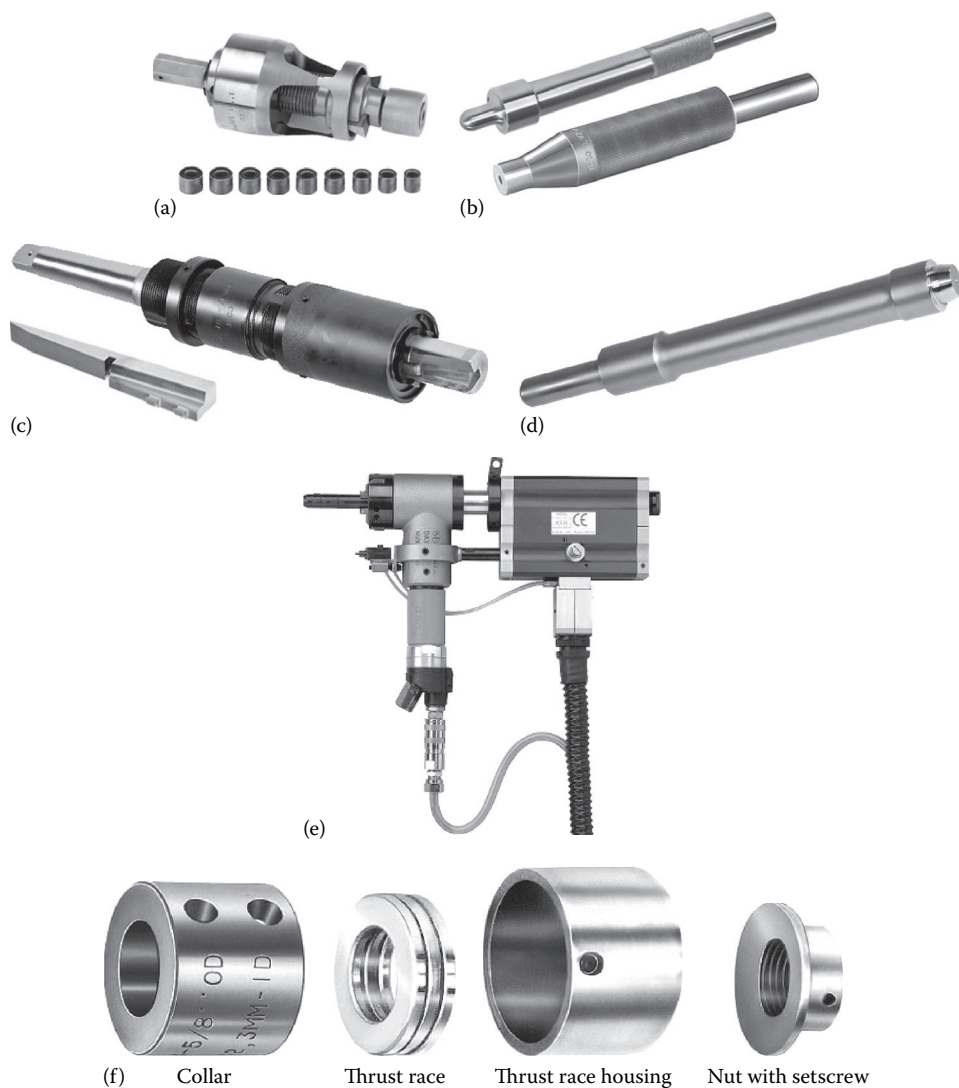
Accessories for tube expansion. (a) Tube end facers, (b) special tool for flaring tube ends, (c) grooving tool, (d) standard reversible thrust collar, (e) tube end beveling machine, and (f) drift to remove stub. (Courtesy of TECO Tube Expanders Company, Leiderdorp, the Netherlands.)
